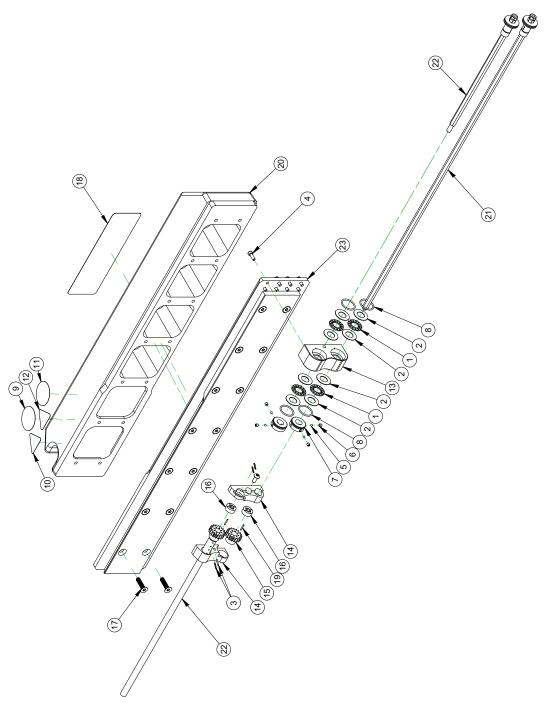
MACHINING ARM ASSEMBLY (P/N 90337 REVISION D)
